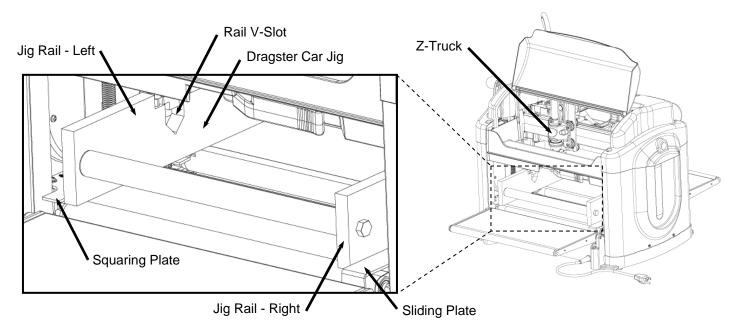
VIEW OF THE DRAGSTER JIG INSERTED INTO THE MACHINE
